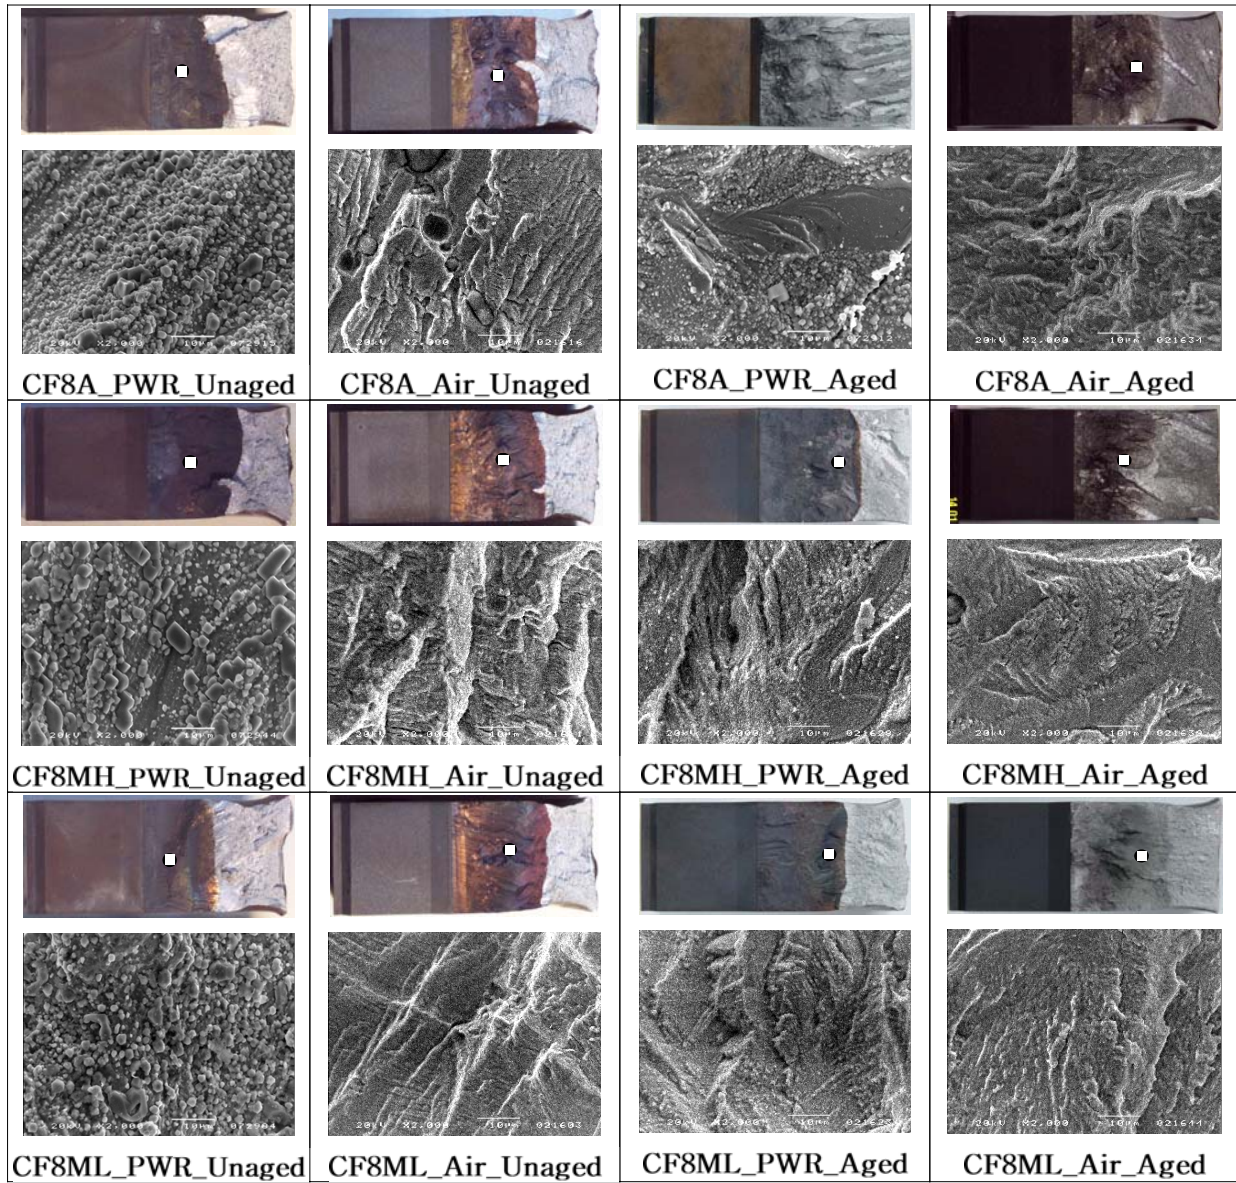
Fractograph after test on air and PWR conditions using aged and unaged specimens.
